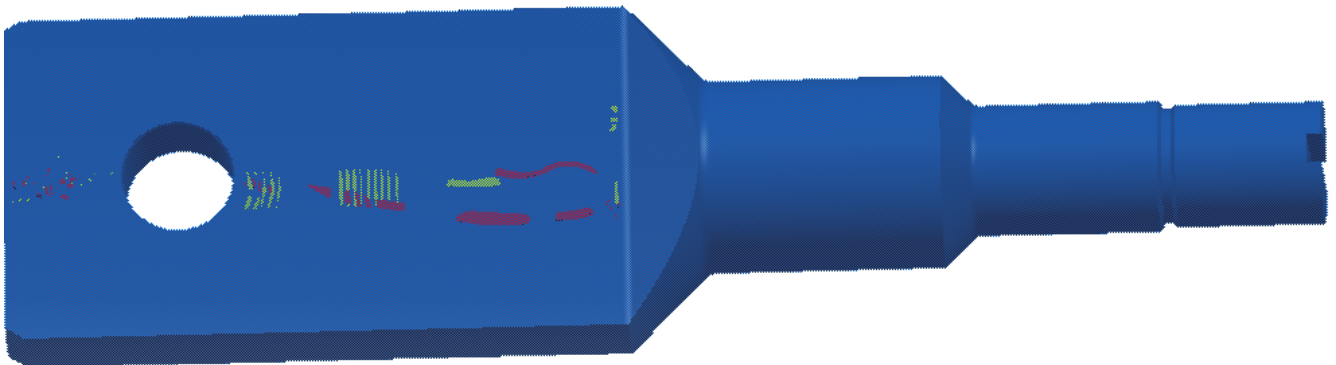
Results of ultrasonic testing performed on the threaded spindle of the beam (upper view)
